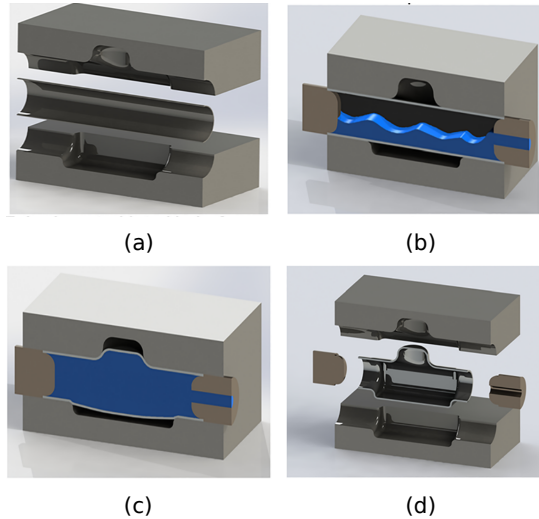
Process sequence in tube hydroforming process: (a) installation and positioning, (b) clamping and filling medium, (c) part forming, and (d) relieve fluid pressures and obtain the final component [5].
